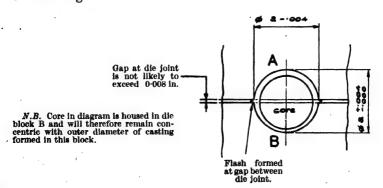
DIAGRAM ILLUSTRATING TYPICAL EFFECT OF IMPERFECT DIE CLOSURE UPON THE TOLERANCES OF A CYLINDRICAL CASTING PRODUCED FROM AN AXIALLY JOINTED DIE
